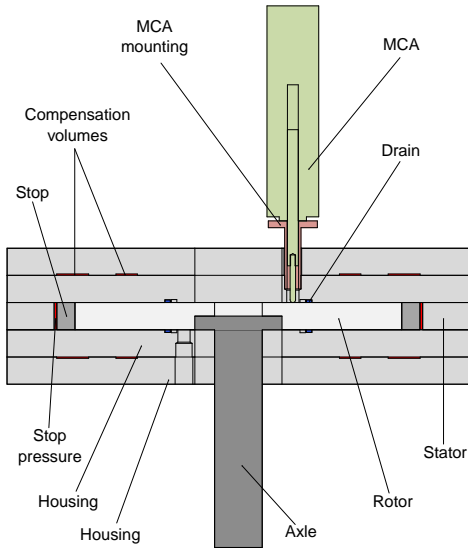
The motor in a section cut. The MCA is mounted at the housing.
